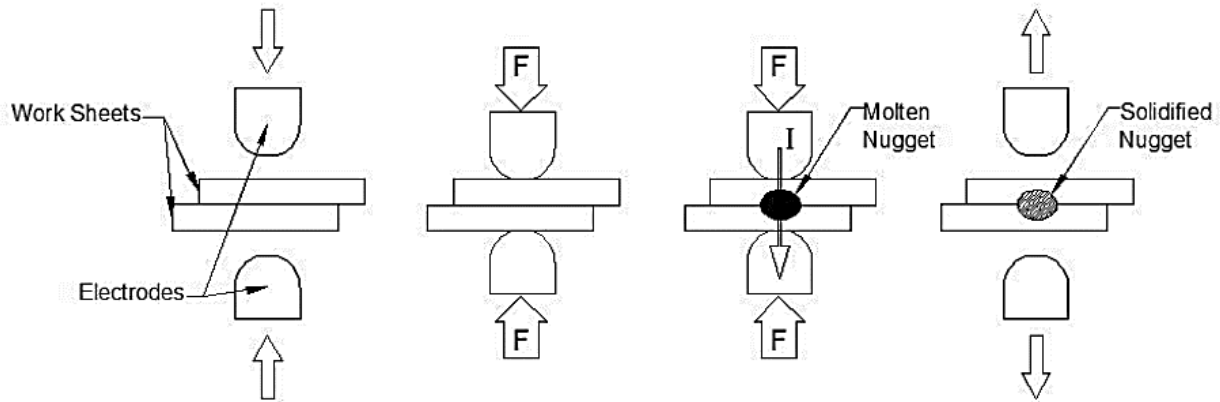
Stages of Resistance Spot Welding [27]
